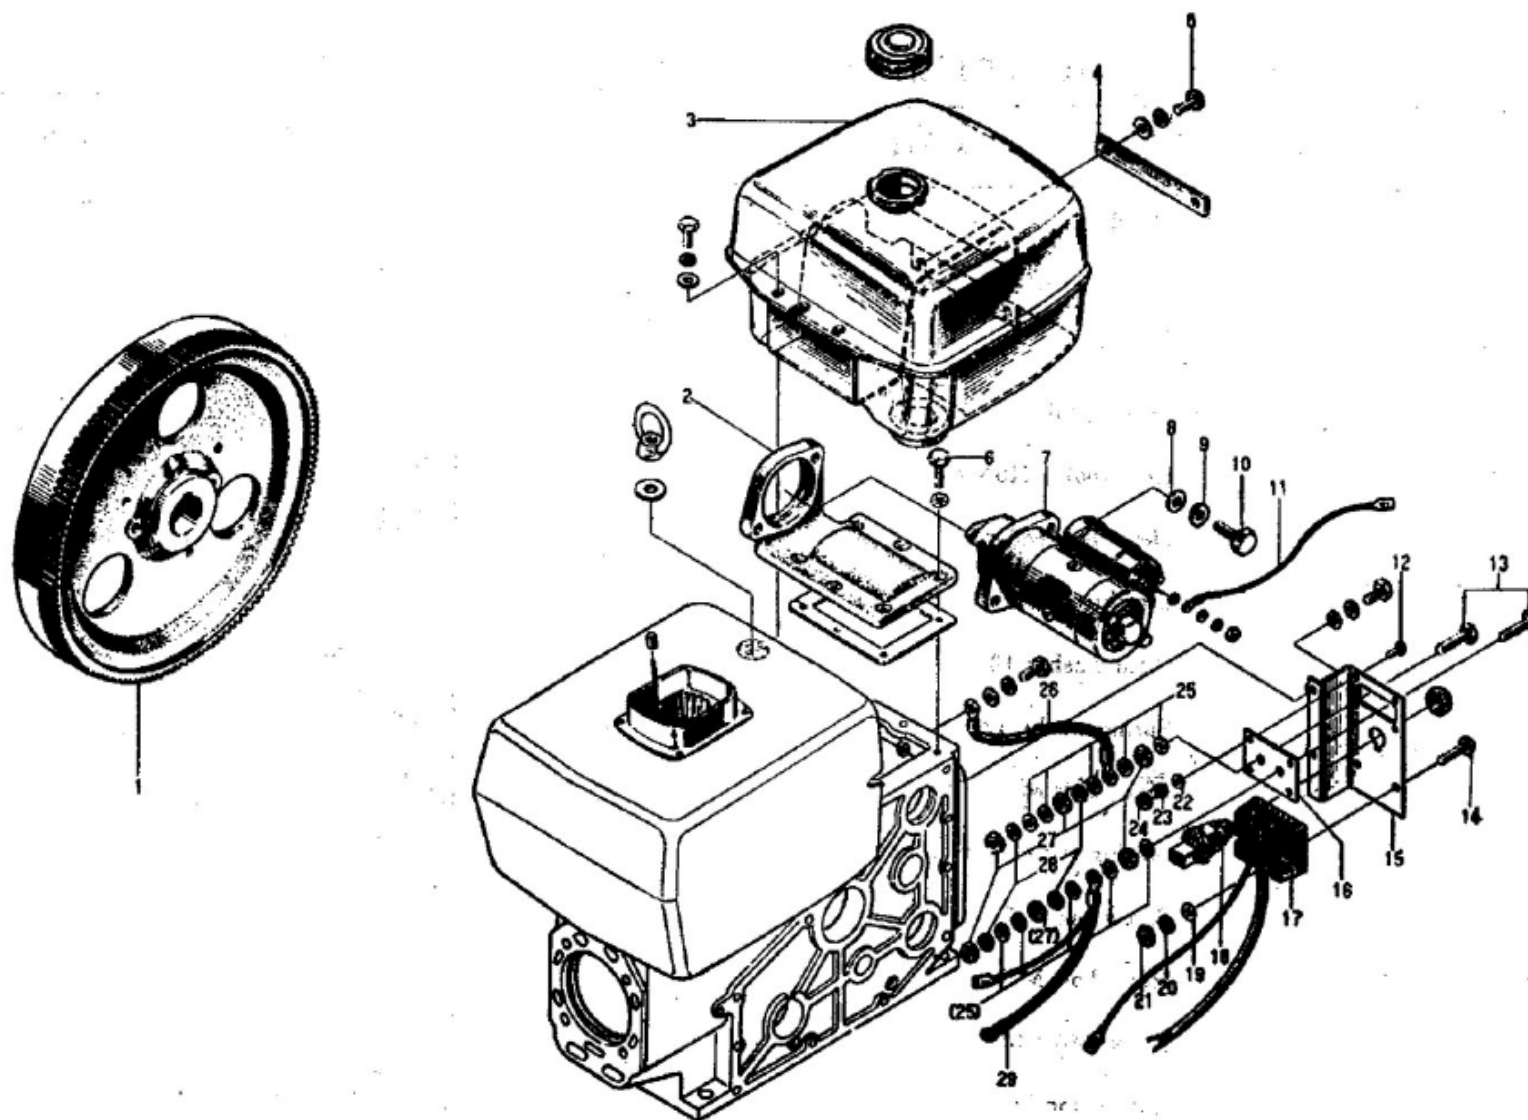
Special Parts for Model S195NM/S1100NM Diesel Engine
